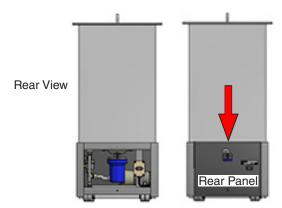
Install rear panel. Openings in panel fit over fluid and electrical connections.
